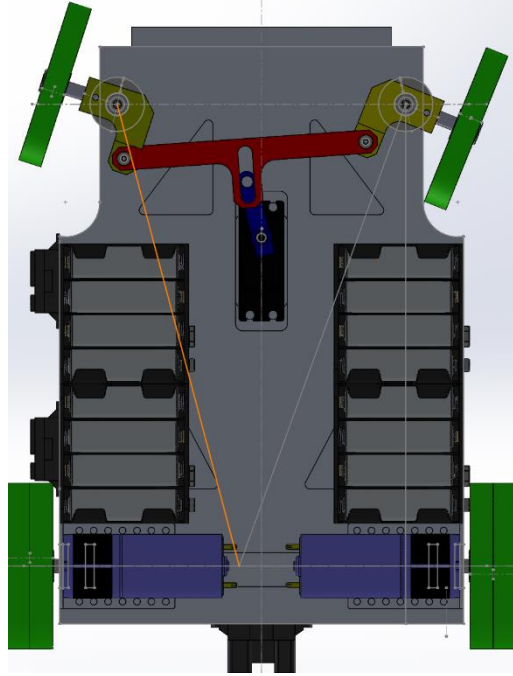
Bottom plate of the robot showing the drive mechanism.
